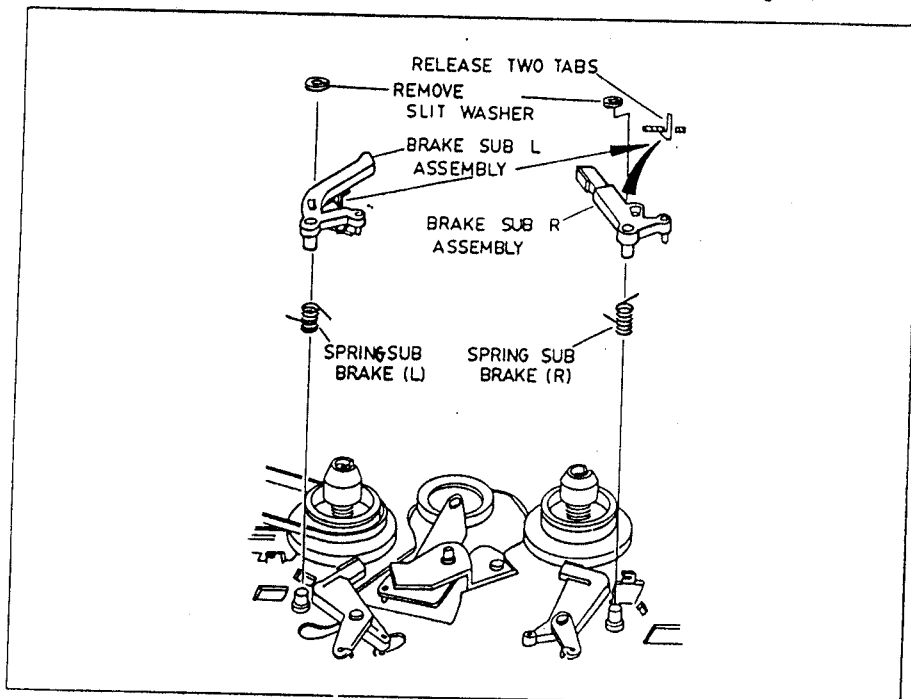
Brake Sub (R) Assembly and Brake Sub (L) Assembly Removal
